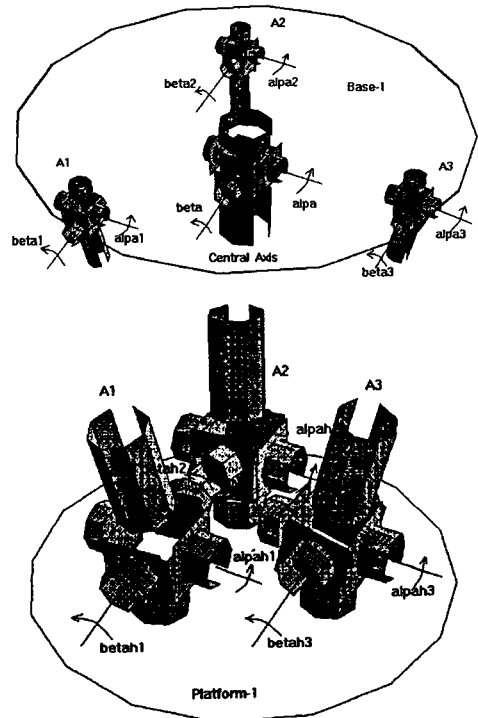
Arrangement of universal joints in base-1 and platform-1
